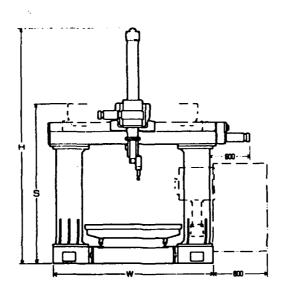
Nagase "Flex-Polisher" Machine Dimensions 87
